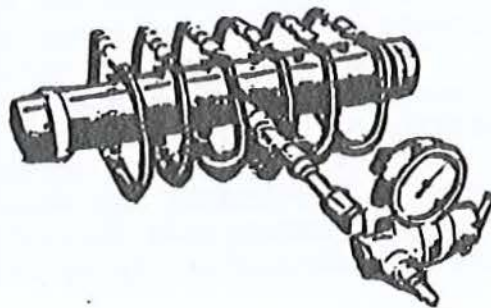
Test Fixture for Fuel Return Tubes and Hoses.
